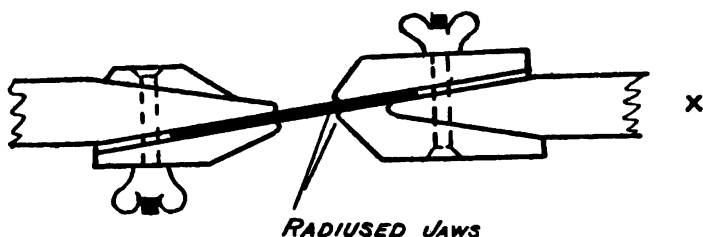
JAWS OF ATCHERLEY BEND TESTING MACHINE.
